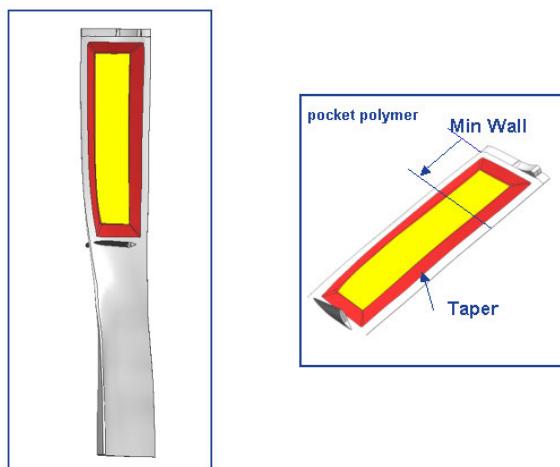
54" Steel-Hybrid: Optimum Pocket Design
